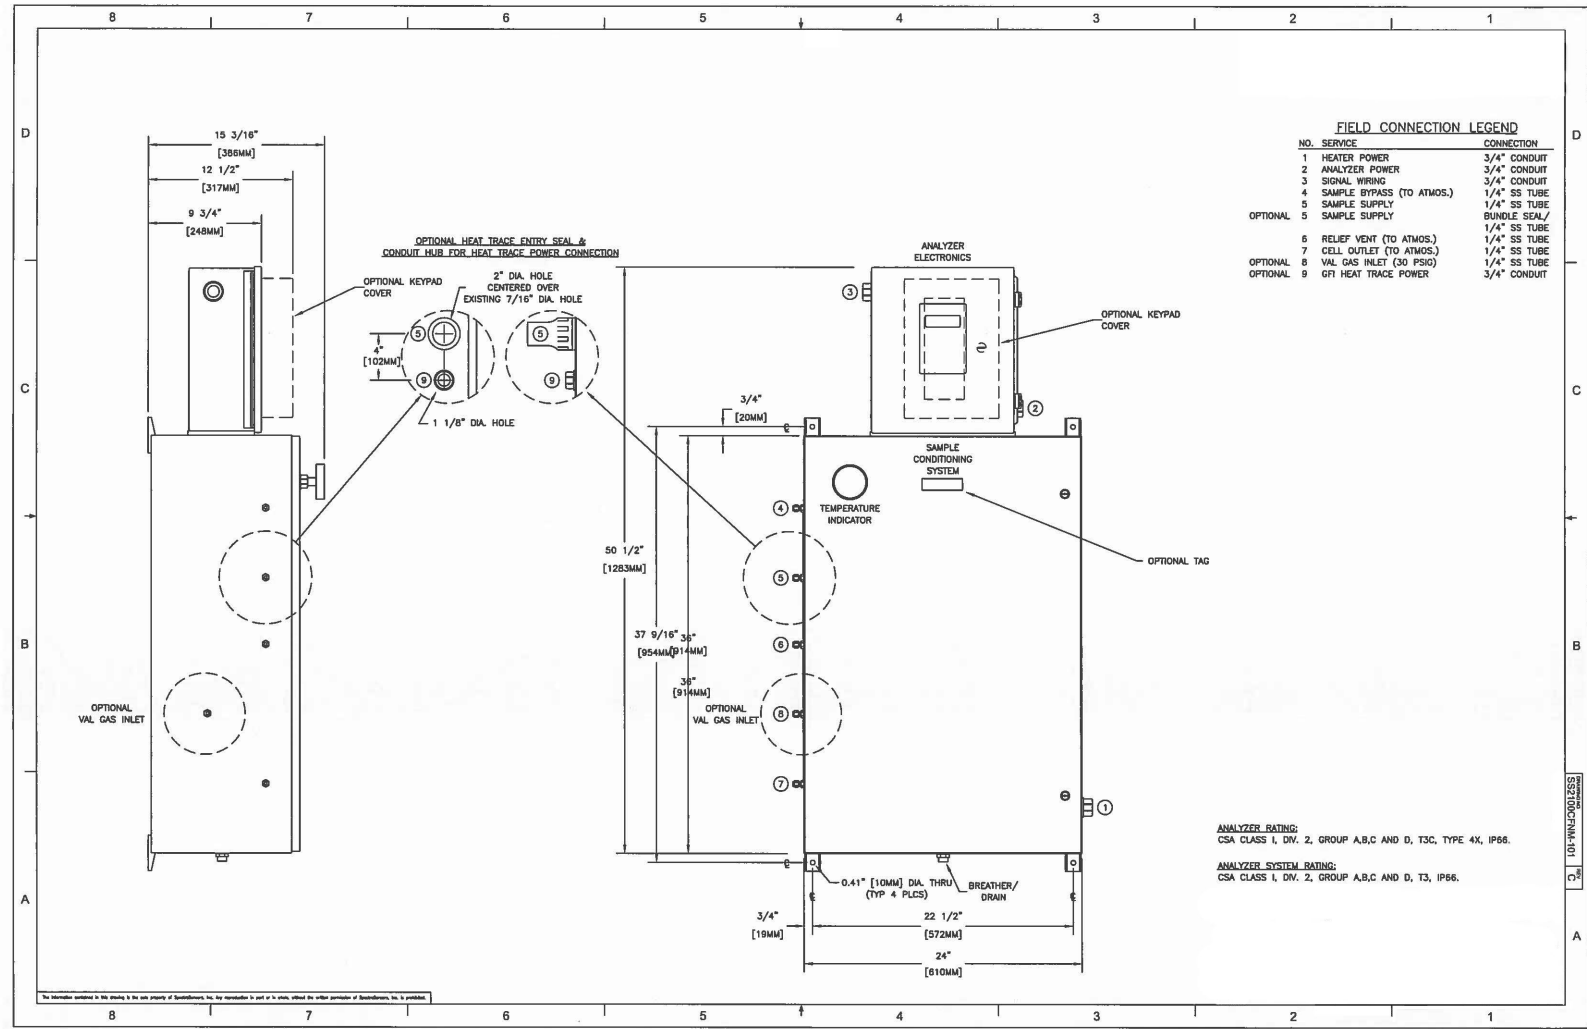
Outline and mounting dimensions - optional heat trace / high H<sub>2</sub>S purge
